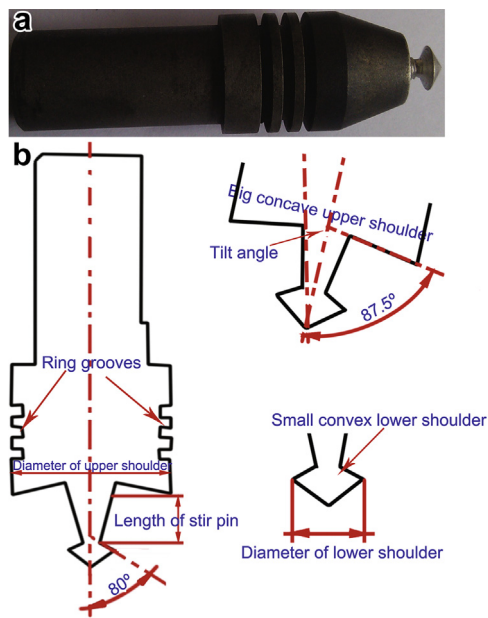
Photos of SSFSW tool: (a) front view of SSFSW tool, (b) details of SSFSW tool.
